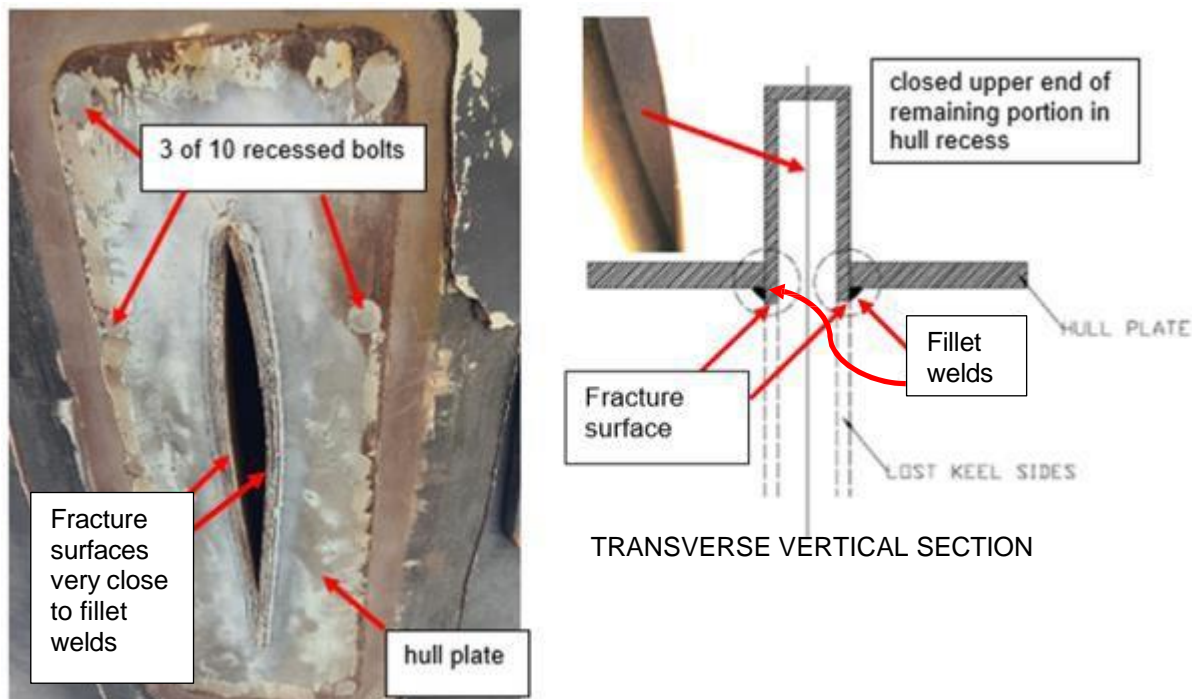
(above, left) – The keel root showing the break's fracture surfaces very close to the fillet welds at the keel root (the fin below it was lost at the time of the incident). The term 'fillet weld' is given to a line of weld connecting two pieces of metal at an angle to one another, in this case perpendicular (90°) to each other. Fig.4 (above, right) – transverse vertical section through the keel, showing the remaining portion of keel fin that inserts into a hull recess, and the horizontal rectangular steel hull plate. The photo in Fig. 5 below represents the intact arrangement (from the same or similar vessel—the photo's true origins have not been confirmed but are representative of the actual arrangement on the vessel):
